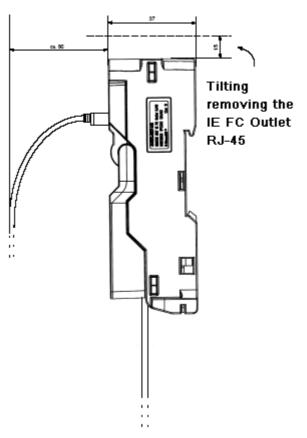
IE FC Outlet RJ-45 (dimensions in mm)
